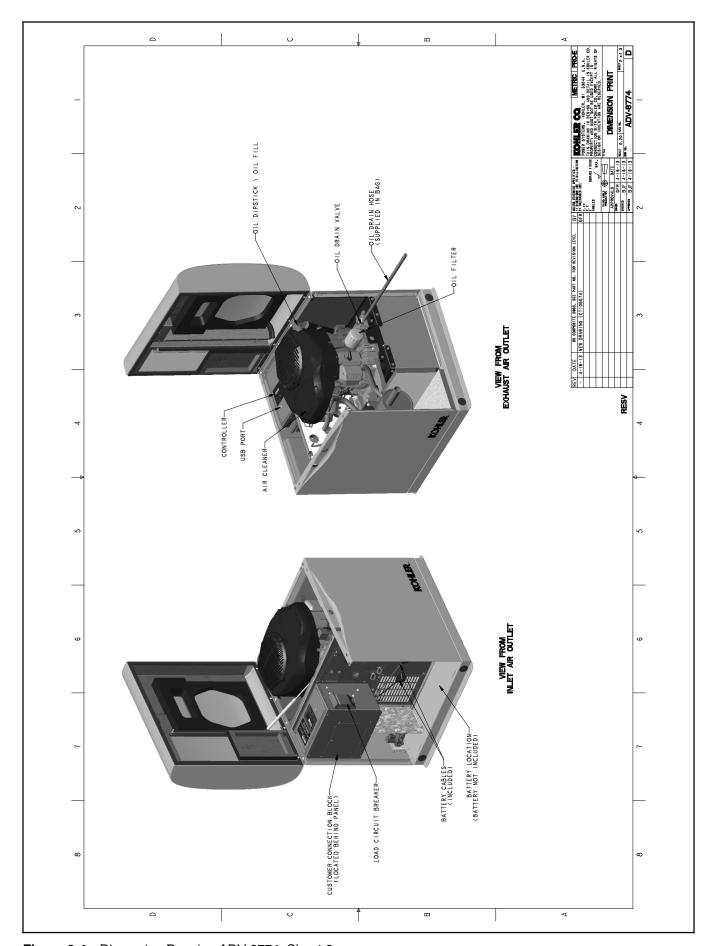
Dimension Drawing ADV-8774, Sheet 2
